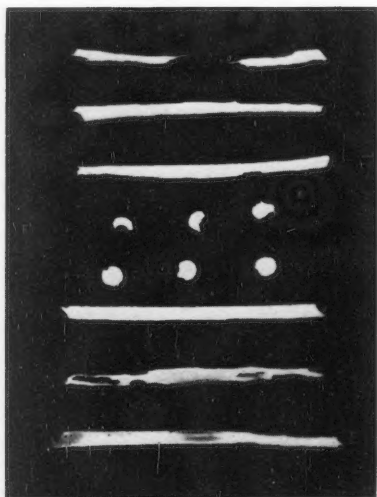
Longitudinal and sectional views of severely worn and corroded wires from a hoisting rope.
